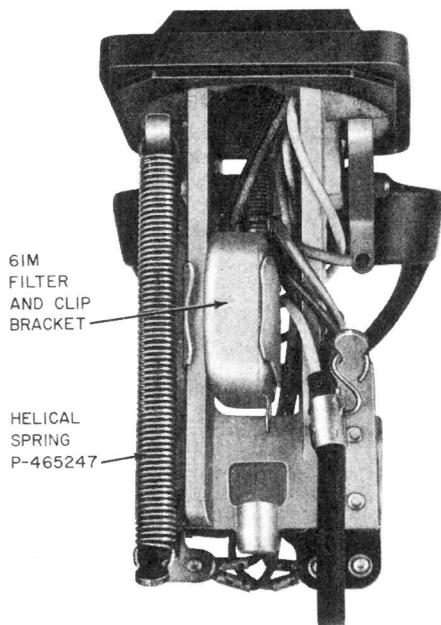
Assembly of Filter on G-Type Handset Mounting
